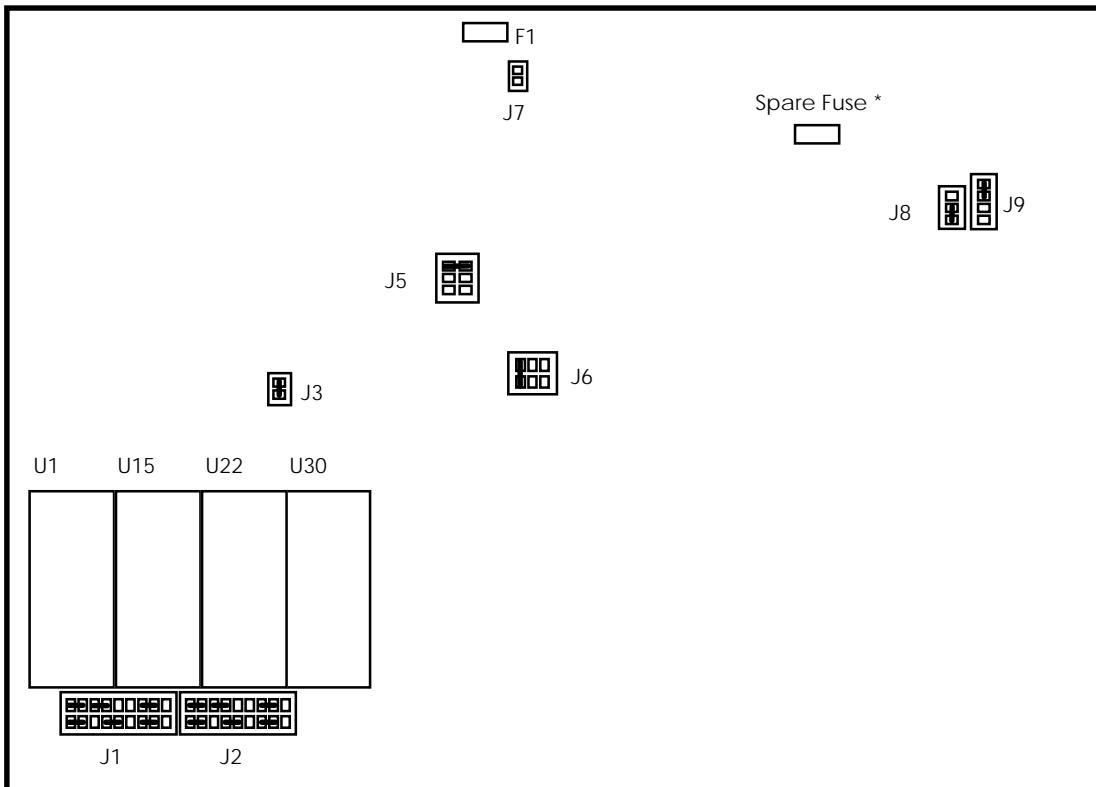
MVME147 Board Jumper Settings, Fuses, and Sockets
